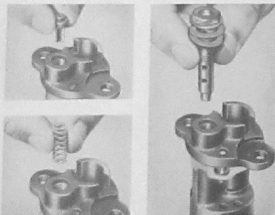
Installing High Pressure Check Valve Plunger, Spring, and Manifold Bolt
